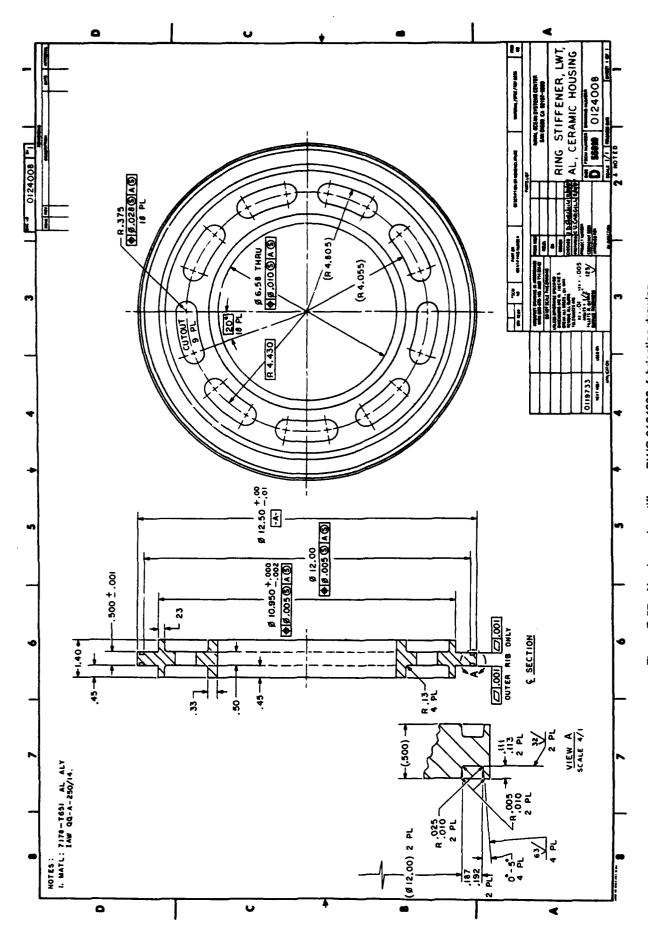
Aluminum ring stiffener DWG 0124008; fabrication drawing.
